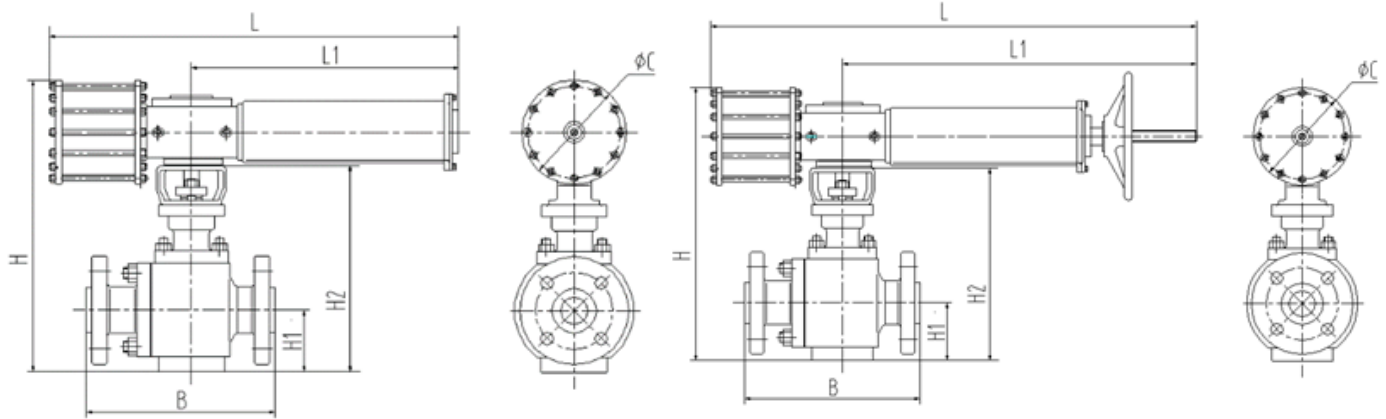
Overall Drawing With and Without handwheel For 4" DN100~10" DN250
